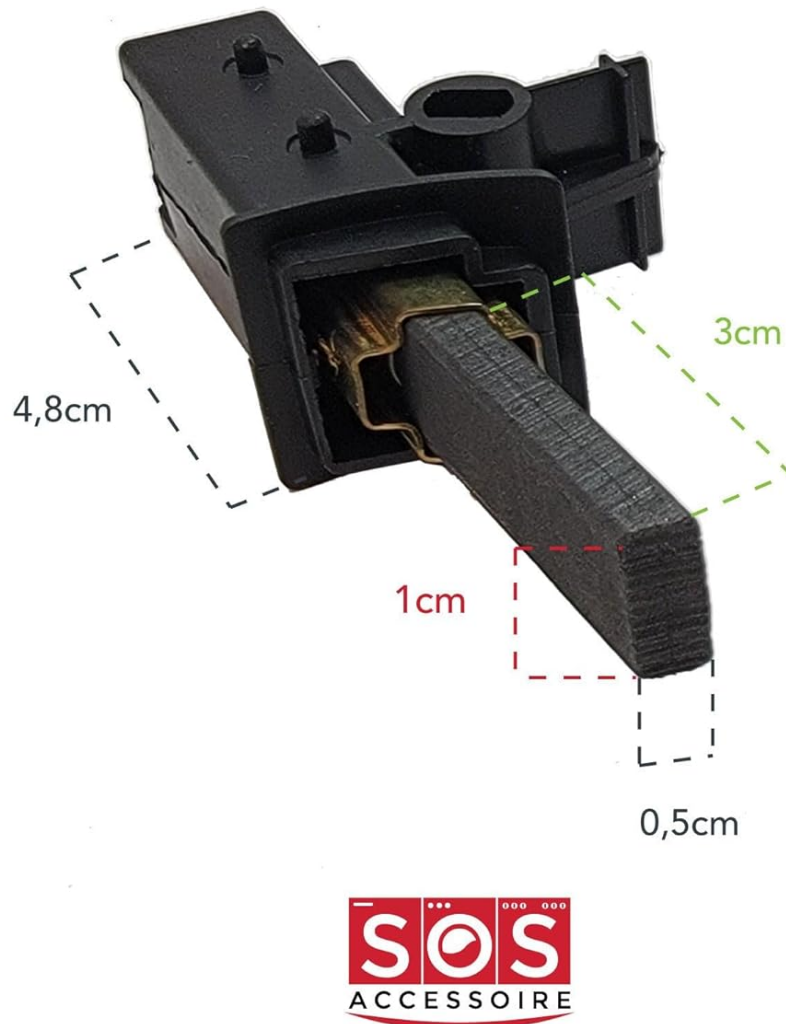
Dimensional diagram of a single carbon brush, showing key measurements for verification.
